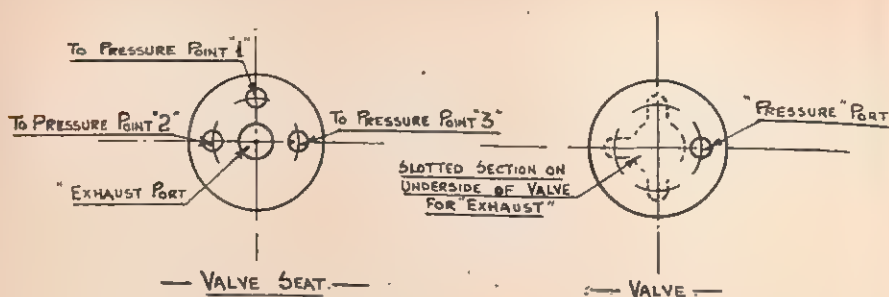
Valve and Seat for Typical Rotary Face Selector Valve.
